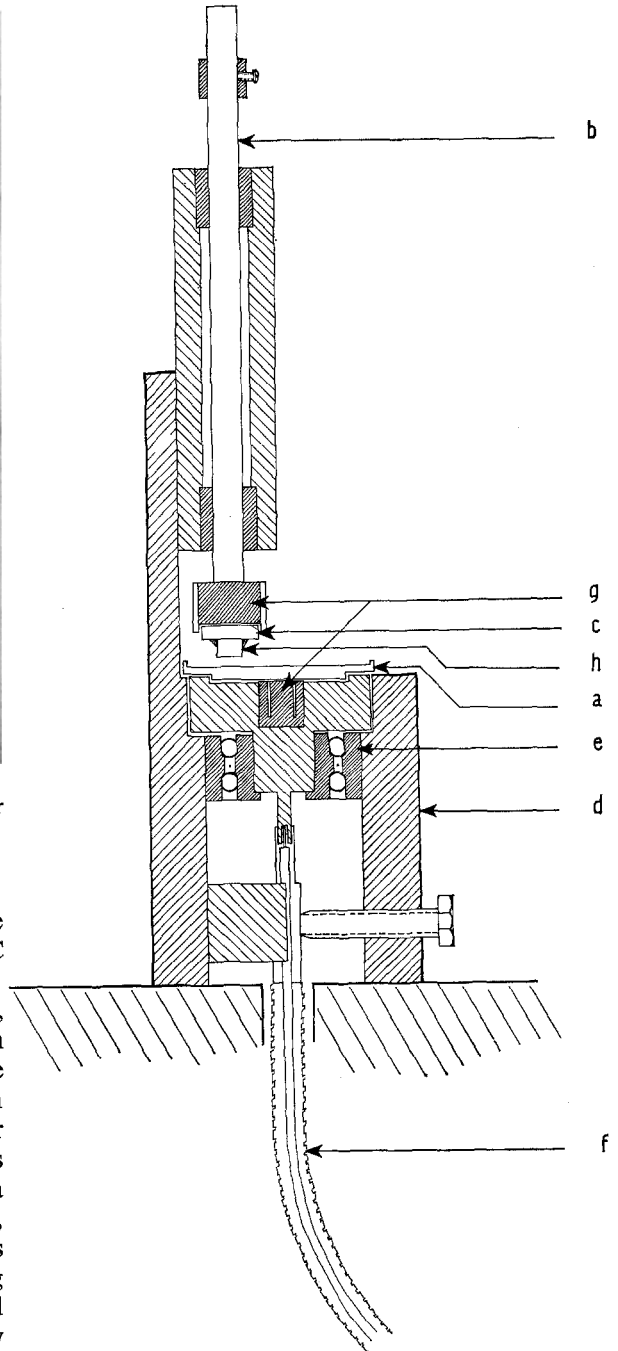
Rotating polishing device: (a) steel wheel and attached abrasive paper; (b) rotating guide; (c) magnetic specimen holder; (d) steel frame; (e) ball-bearing; (f) rotating shaft; (g) magnets; (h) specimen.
